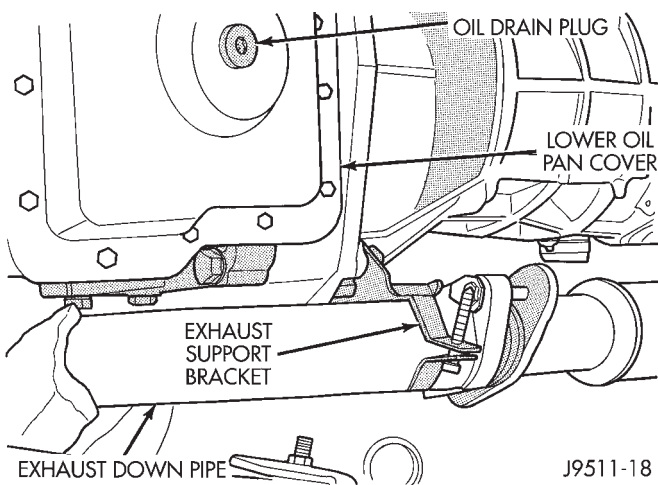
Exhaust Down Pipe to Front Exhaust Pipe
